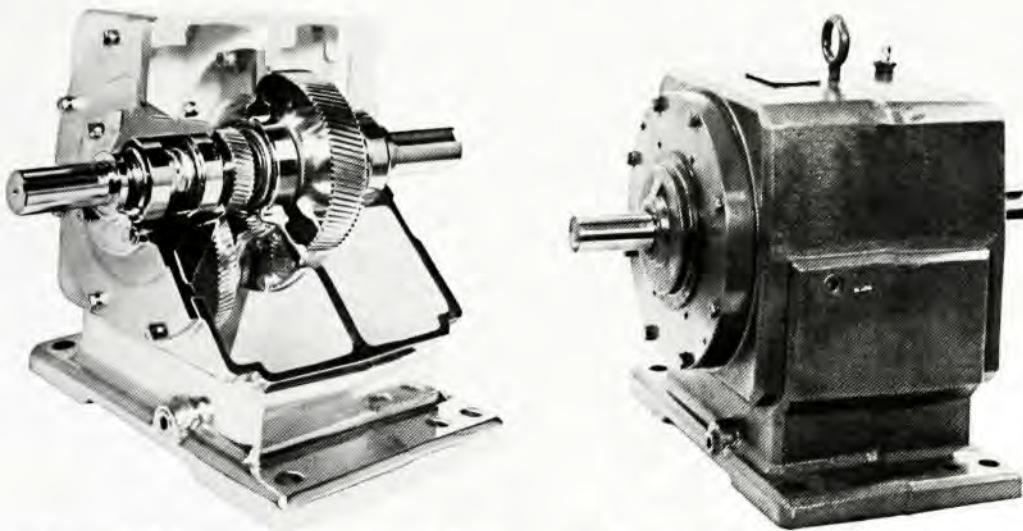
Double-reduction gear reducer. First stage, helical gears; second stage, spur gears. (Bison Gear & Engineering Corporation, Downers Grove, IL)
